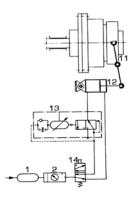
pneumatical - mechanical operating device of a Conax® clutch, type CM, hand actuated and with automatic release of the operating system:
